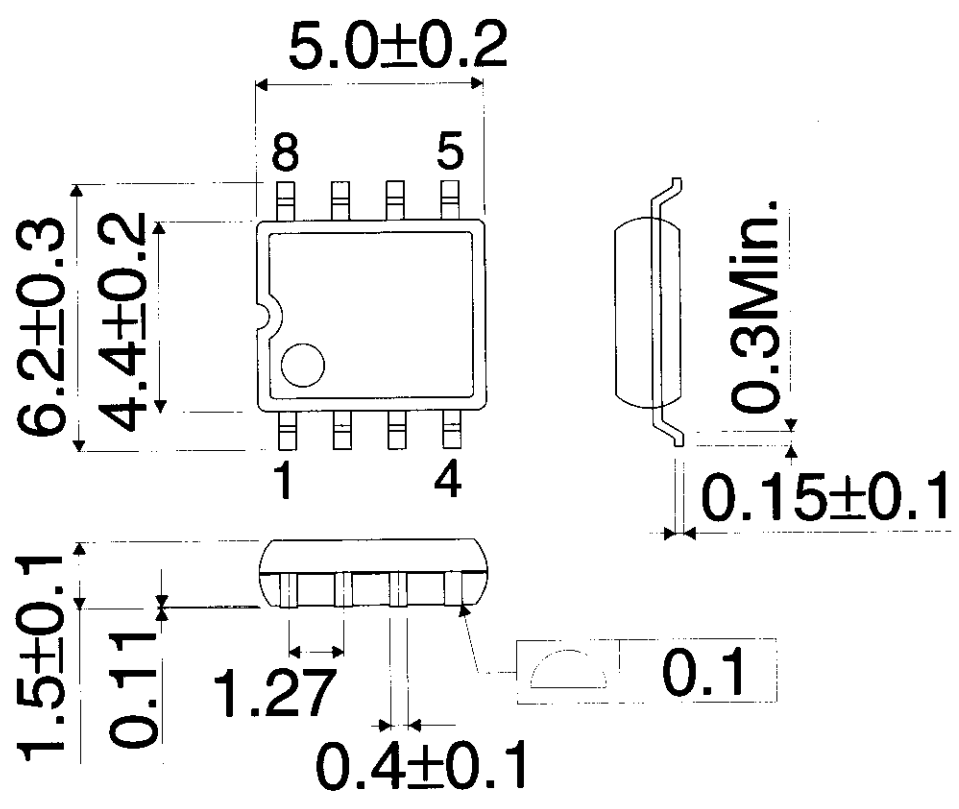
Outline Dimensions SOP8(BR93L66F-W)
